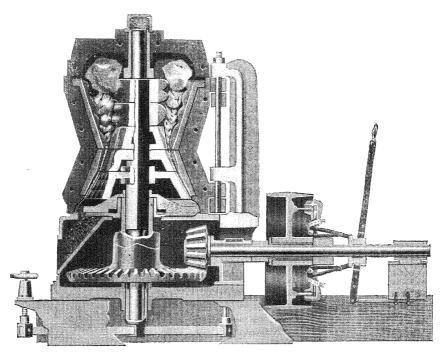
SECTIONAL VIEW OF ROTARY CRUSHER
